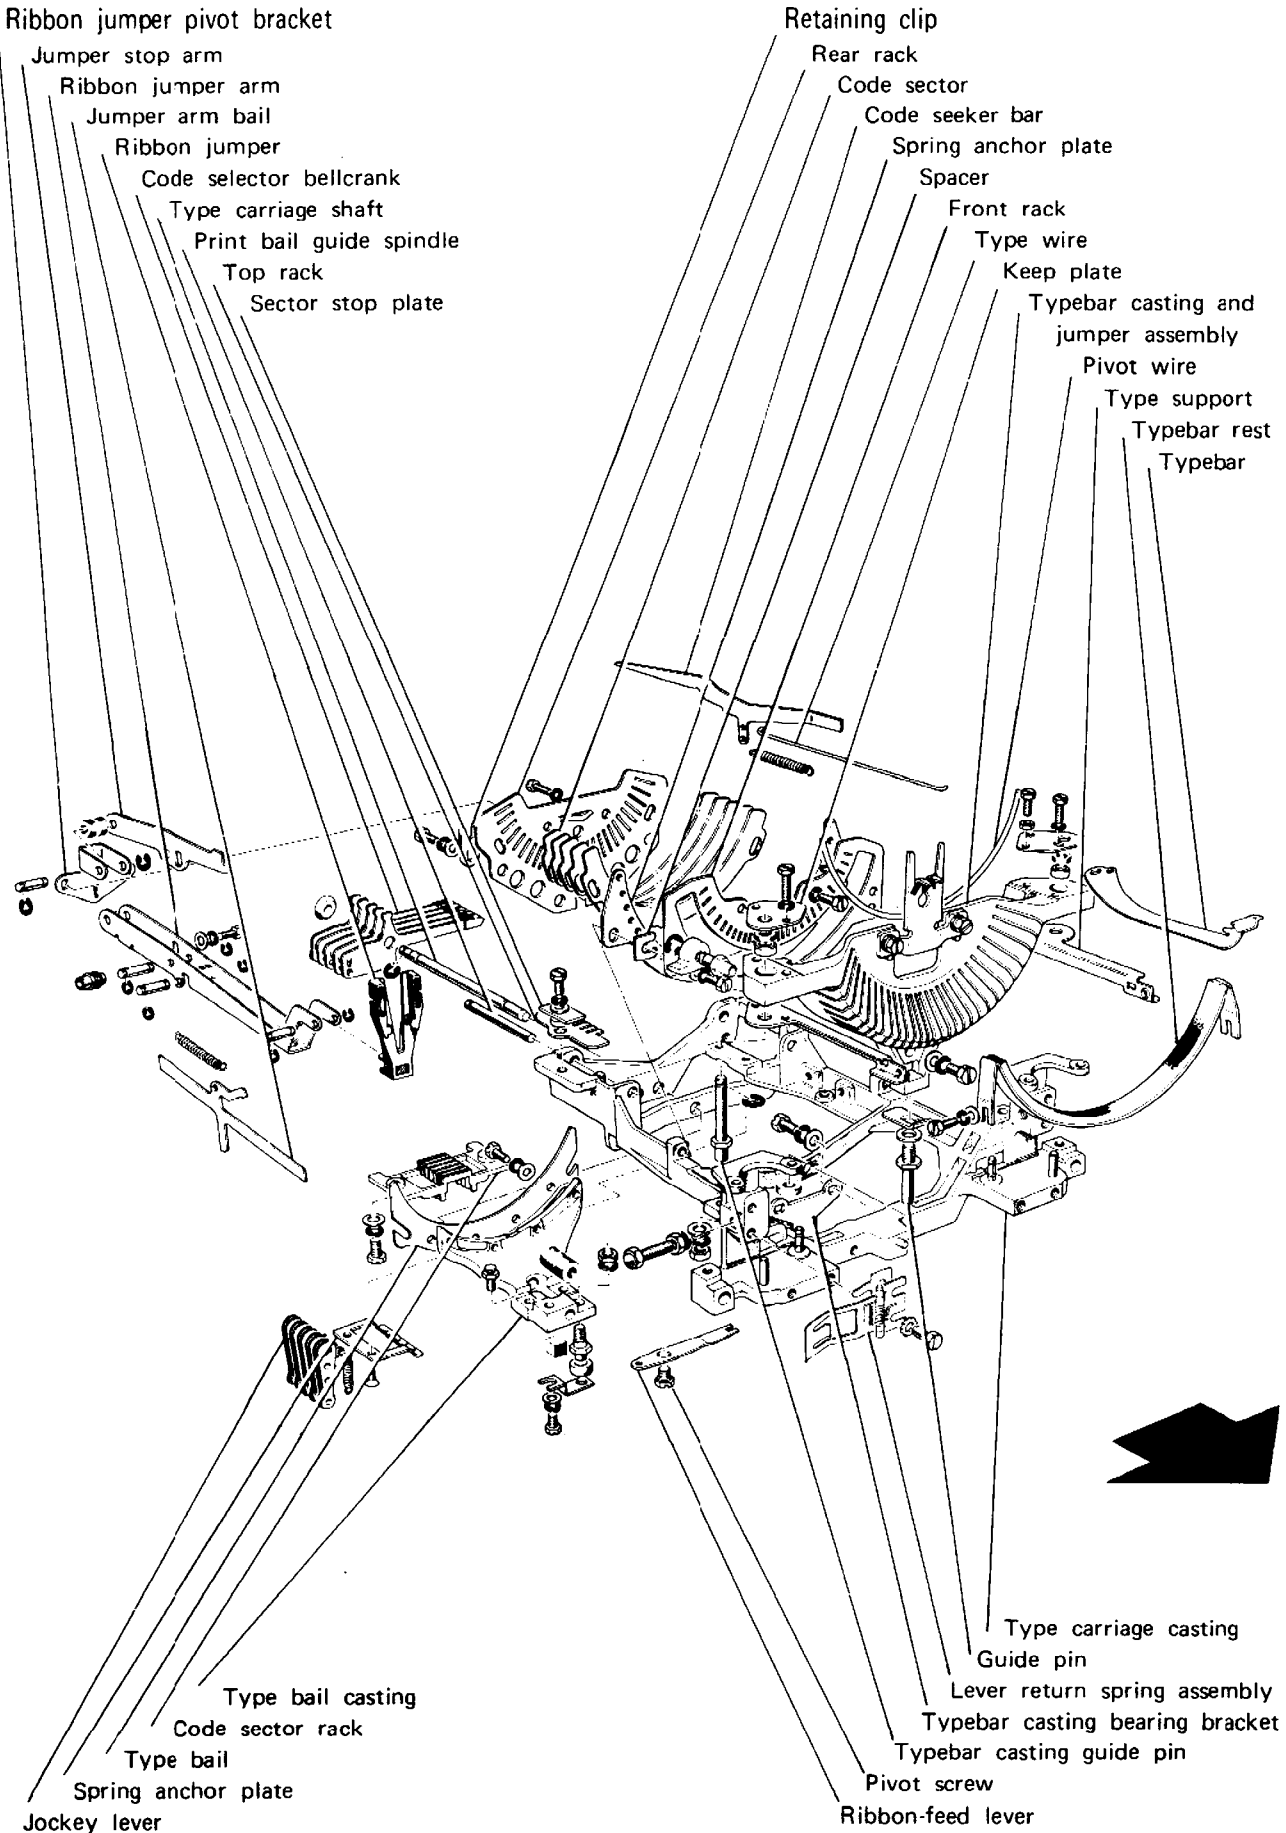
TYPE CARRIAGE AND RIBBON UNIT TYPE BASKET AND CODE SECTORS
